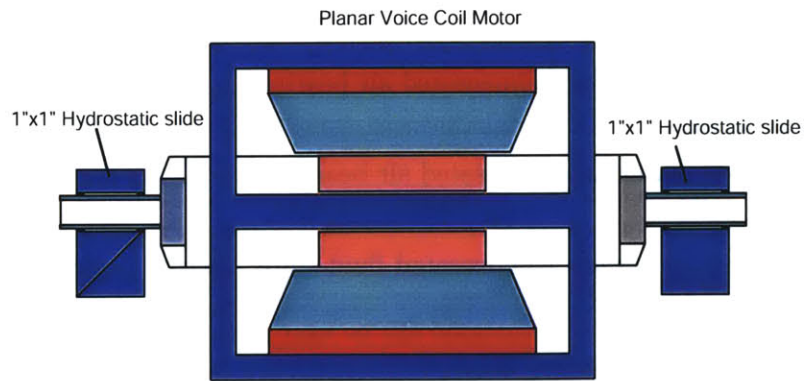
Sketch of a planar style VCM mounted between two 1" x 1" hydrostatic bearings.
